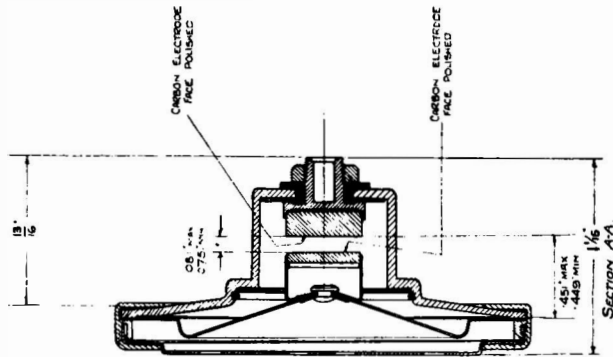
SIEMENS TYPE TRANSMITTER.
